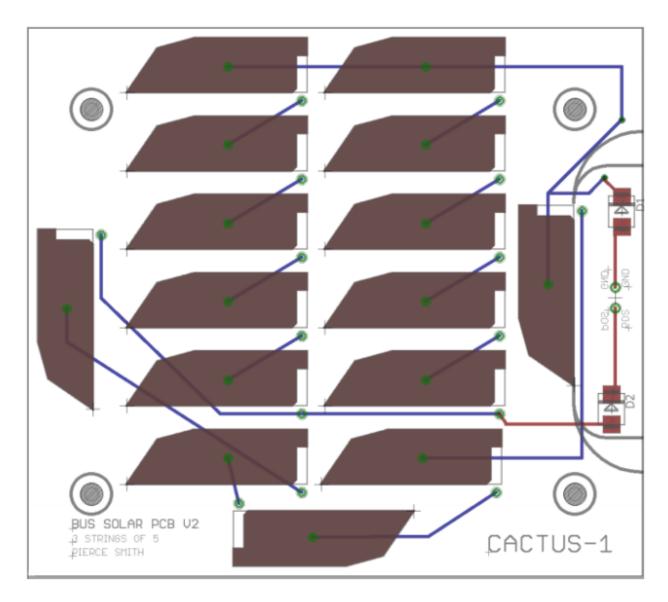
CACTUS Solar Panel PCB Layout - Smith, R. P.
